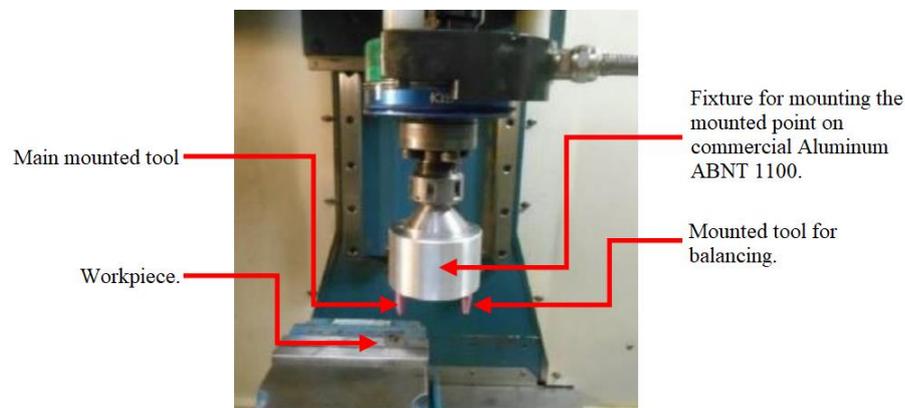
An overview of the assembly system for the holder-tool-workpiece.
